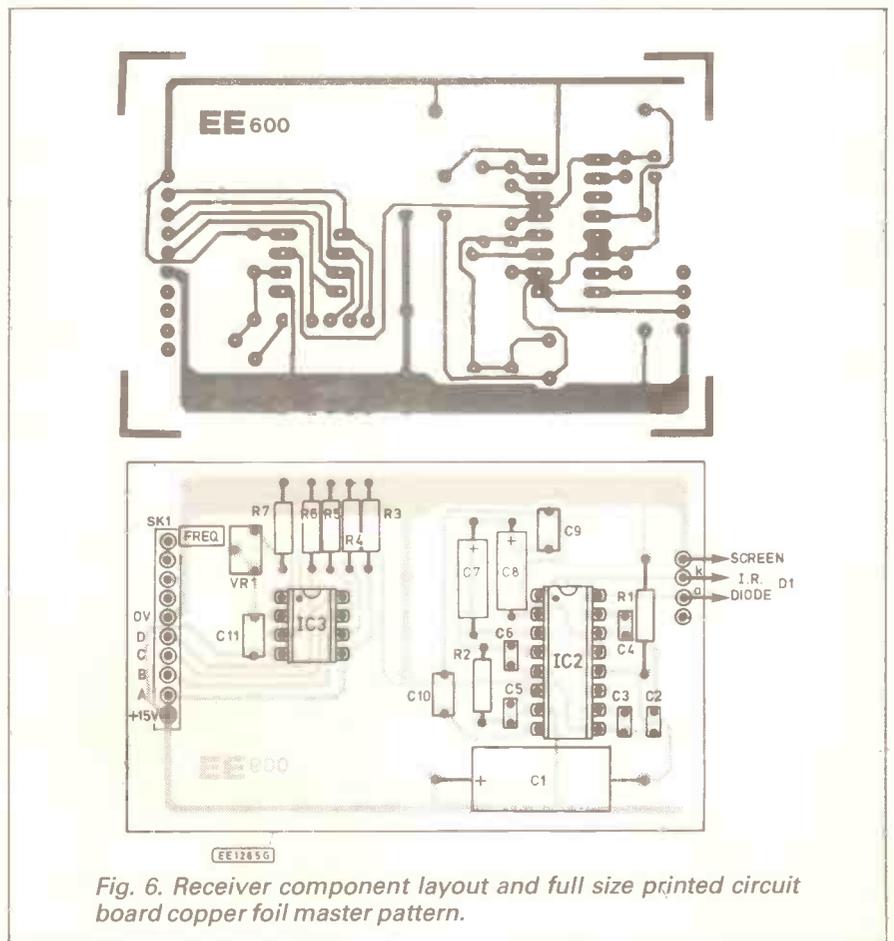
Receiver component layout and full size printed circuit board copper foil master pattern.
